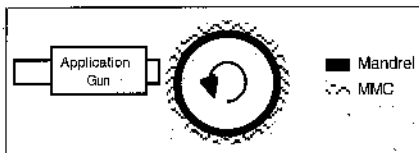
The SSF configuration for producing a MMC tube over a mandrel.
